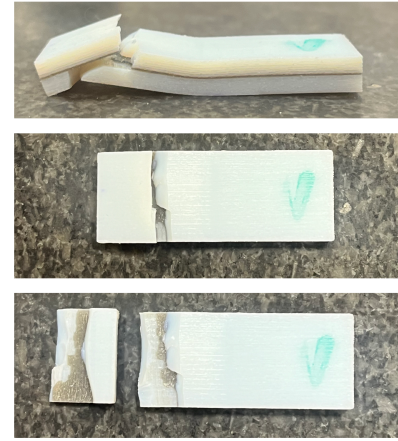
Sample 1 with $c/t = 0.1$ after fracture.
